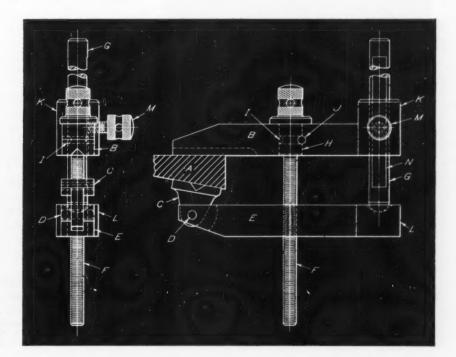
A finger clamp incorporating a swivel-block provides an effective grip for non-parallel surfaces.
